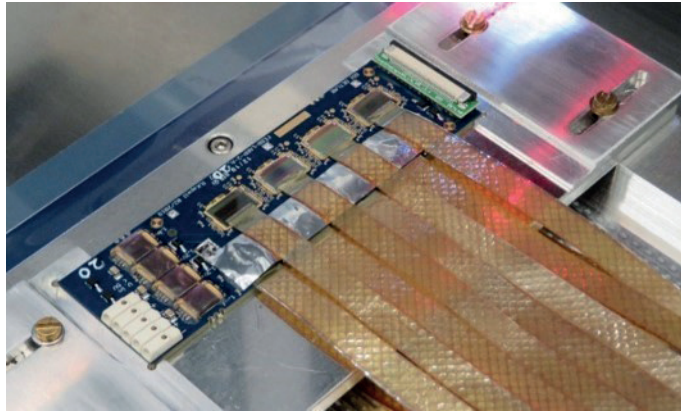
Module assembly: Micro-cables tab-bonded to the read-out ASICs which mounted on a front-end readout board.
